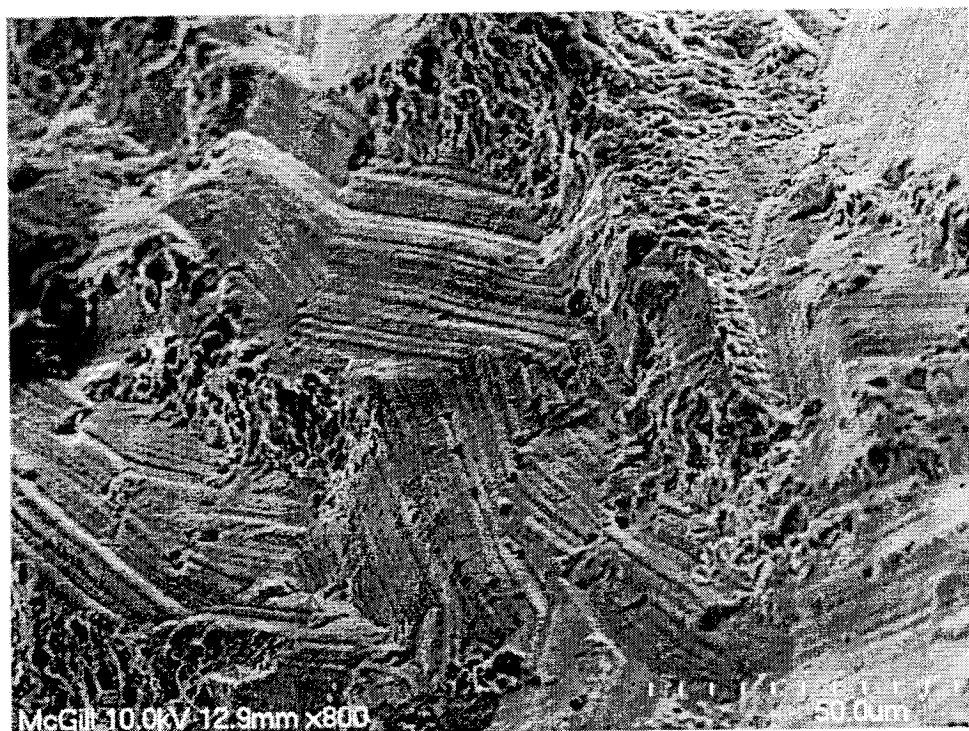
Fatigue fracture in specimen of Al alloy 7075-cryo. The surface exhibits a pattern of fatigue striations which are visible as parallel lines.
